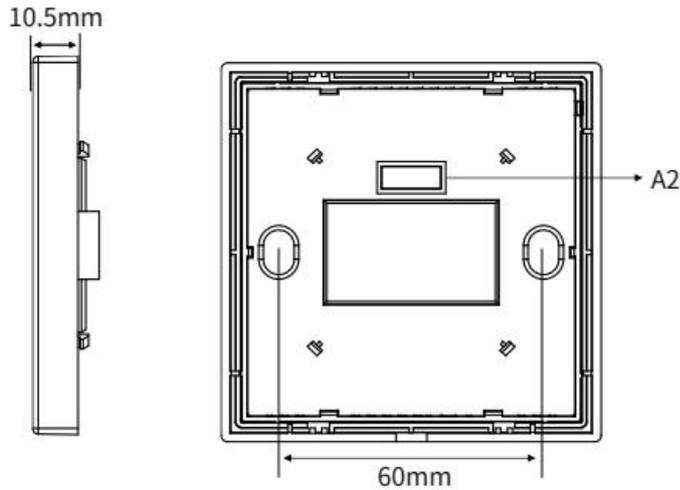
Dimensions - Side View    Figure 5. Dimensions - Back View
